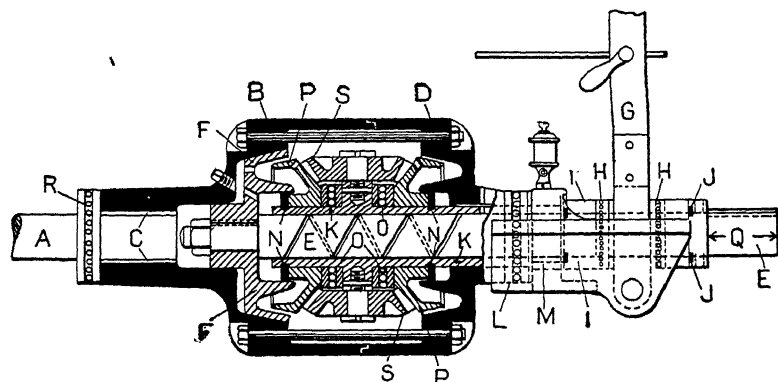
FRICTION CLUTCH REVERSING GEAR.
